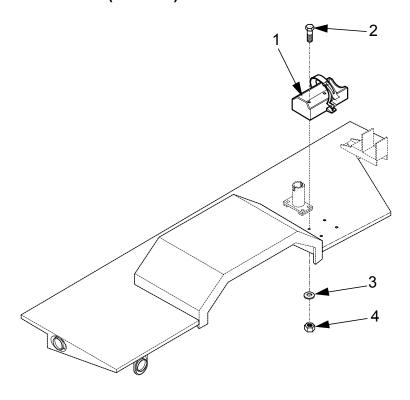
Bracket, Fire Extinguisher, 0KDP7 90270191
